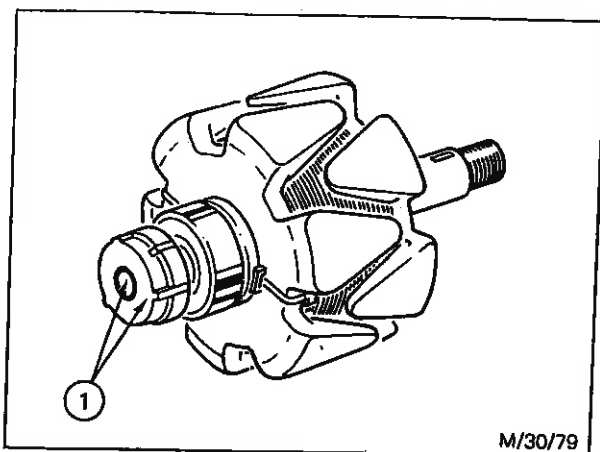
Slip Rings, 17ACR'M' Alternator
